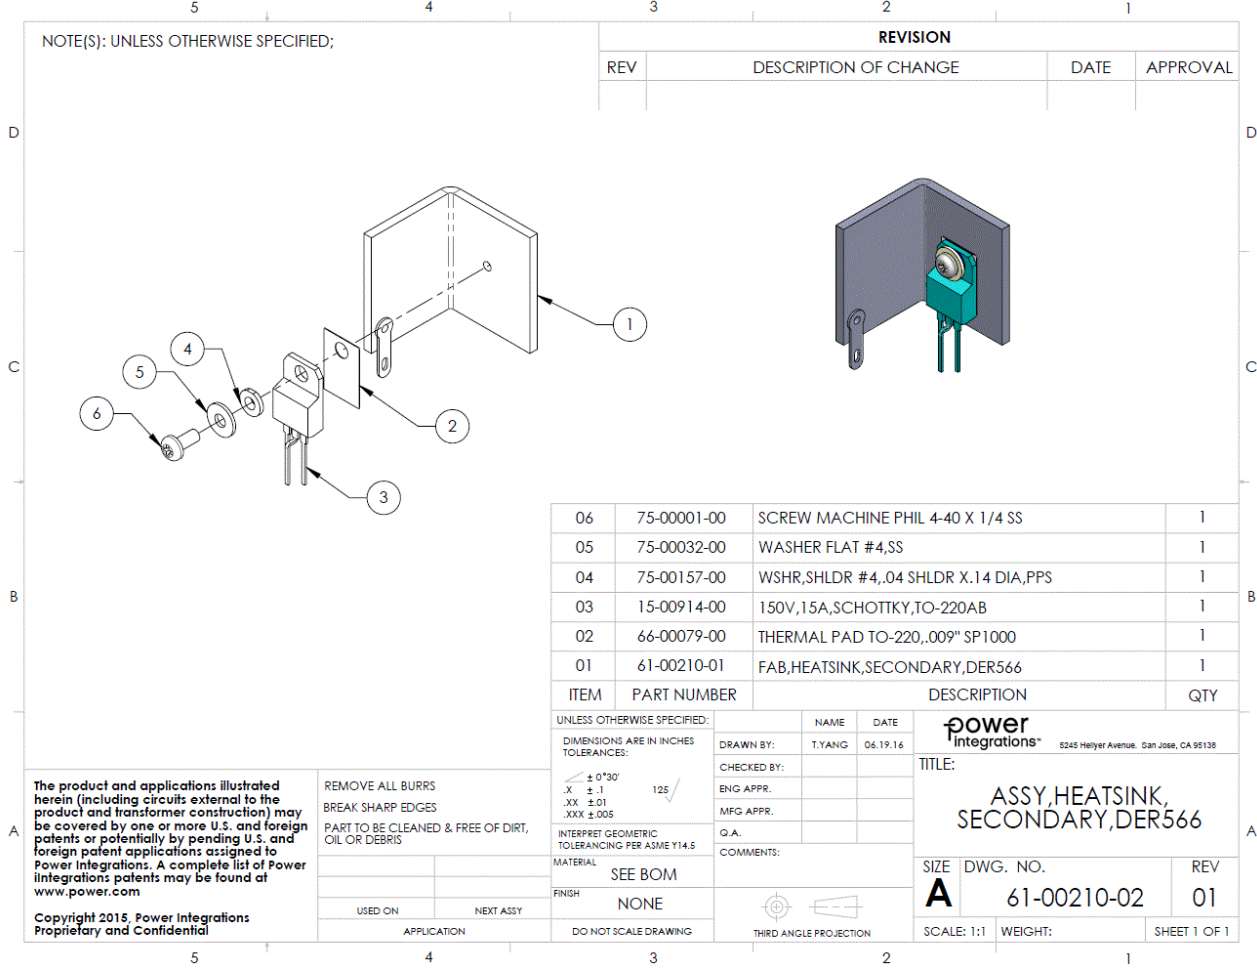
DER-566 Output Rectifier Heat Sink Assembly.
